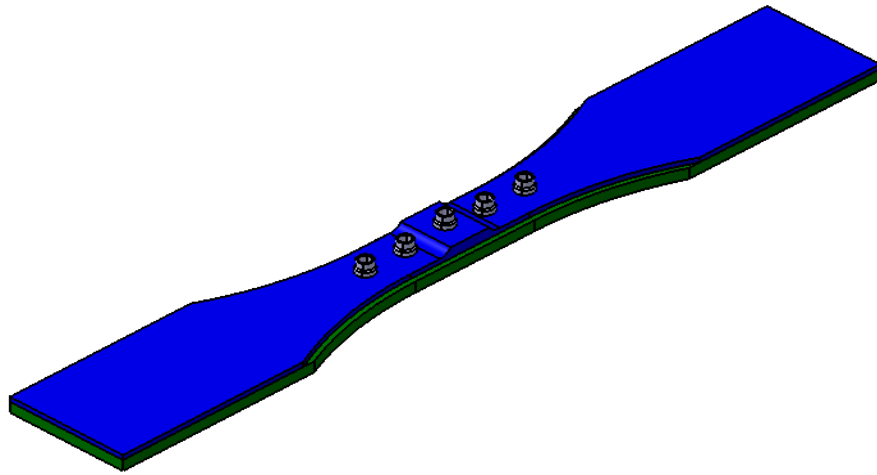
Fatigue Dogbone Bolt in Radius - Assembly - Isometric View
